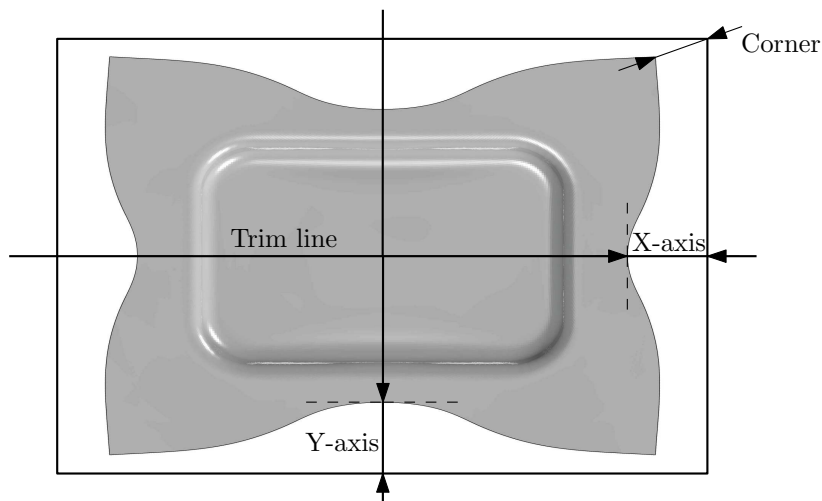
Drawing of a panel - Draw-ins measurement and trim line.
